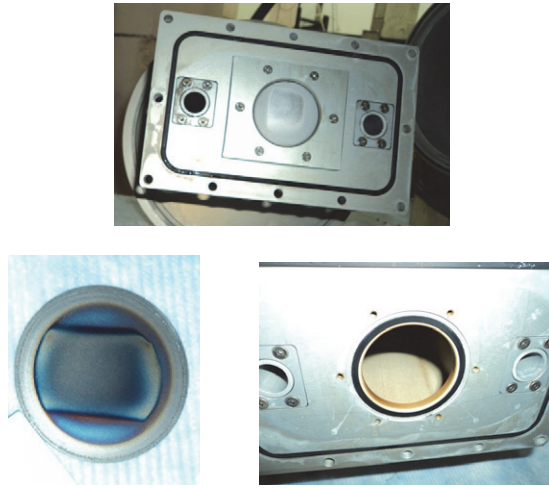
Latest target failure, an O-ring failure attributed to radiation damage: Top is water side, left bottom is beam side of the beryllium and right is target housing.
